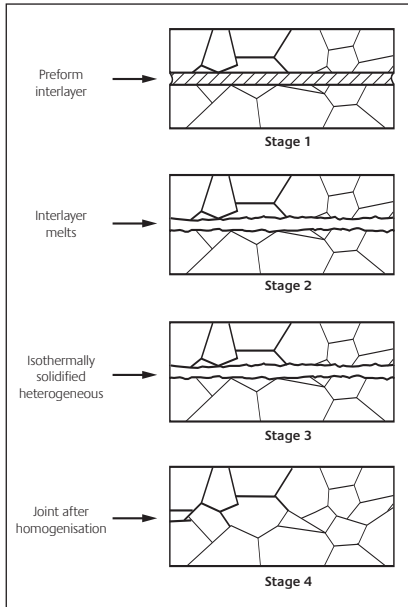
Sequence of steps in diffusion soldering with a tin layer
